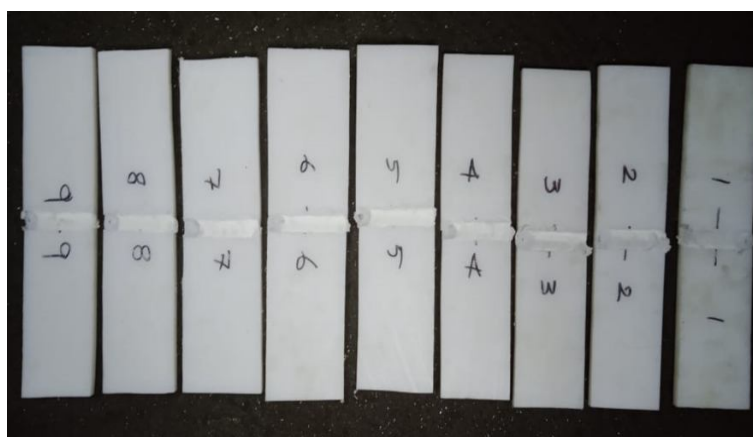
FSW UHMWPE Welded Plate Images
